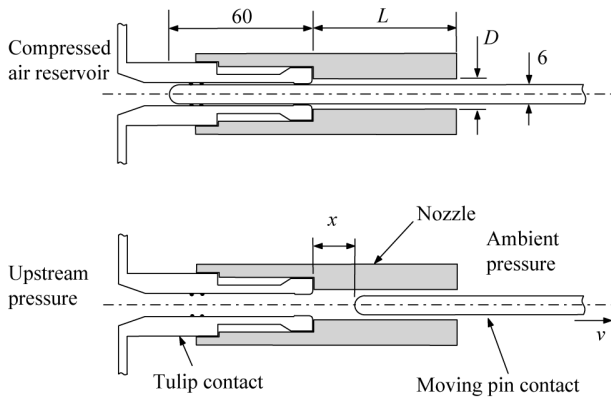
The axisymmetric contact and nozzle geometries in closed position (upper drawing) and shortly after opening (lower drawing).  $L$  and  $D$  are the length and inner diameter of the nozzle, respectively. The contact position is  $x$ . Dimensions are in millimeters.
